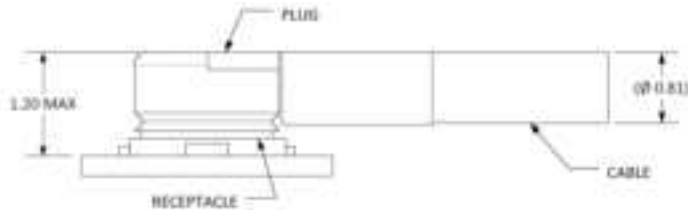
Connection between RF Connector and Mating Plug Using $\varnothing 0.81$ mm Coaxial Cable
